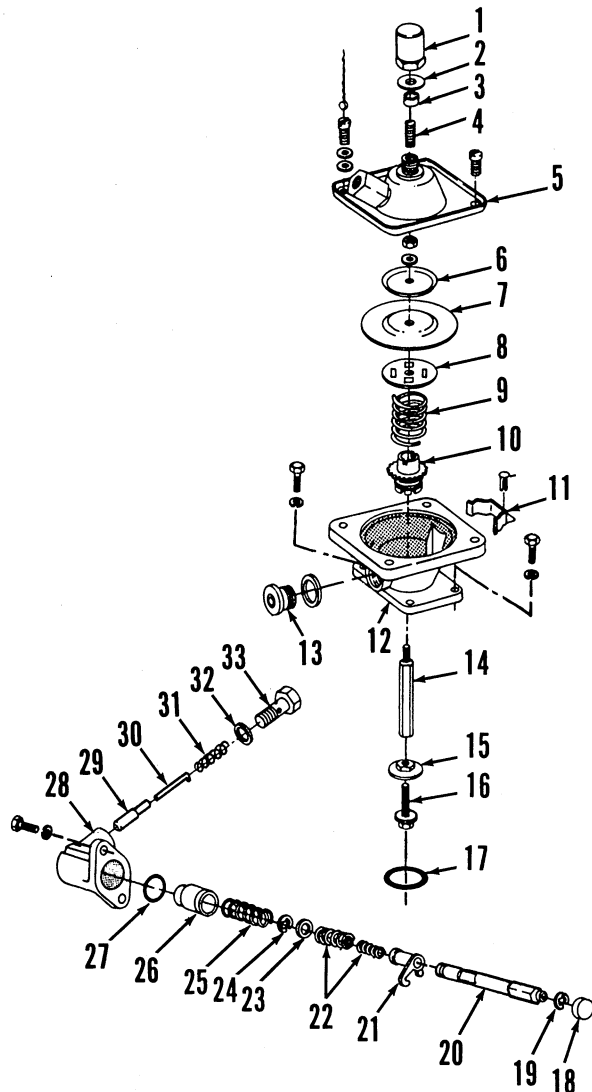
Exploded view of injection pump aneroid assembly and hydraulic aneroid activator used on Models 4250, 4450, 4650 and 4850.
